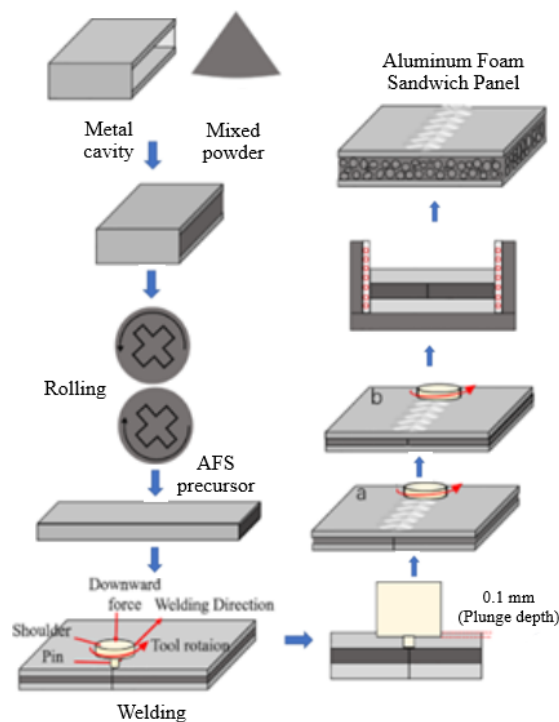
Friction Stir Welding Process of AFS precursor (Su et al., 2021)
